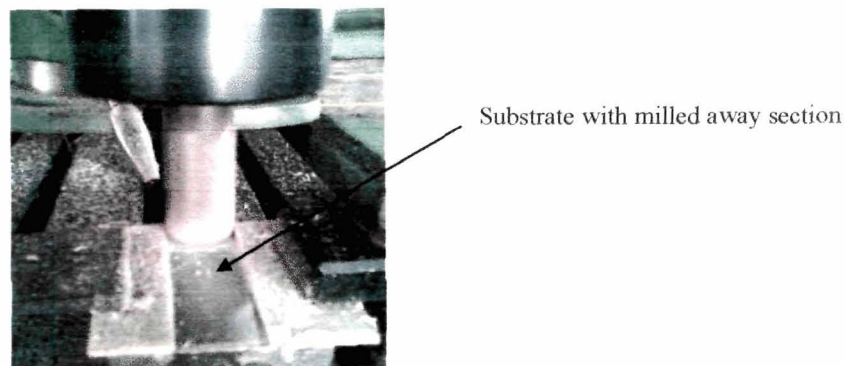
(a) Single side copper clad substrate showing region to be machined out (end view)
